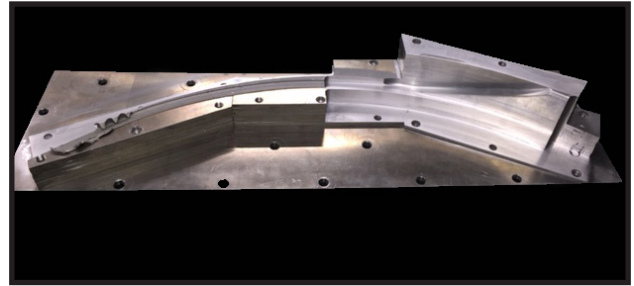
Partially-machined friction stir welding demonstrator article, view 1
